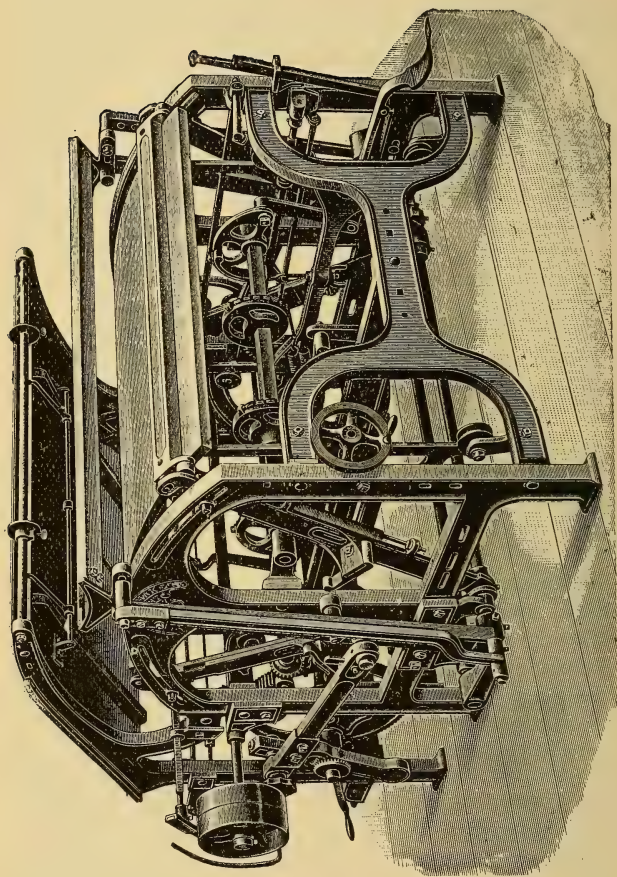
IMPROVED CLOTH PLATING MACHINE.
